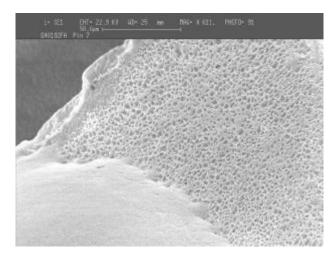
The bottom of the Pin 7 shows evidence of melted solder over a possible fracture surface.
